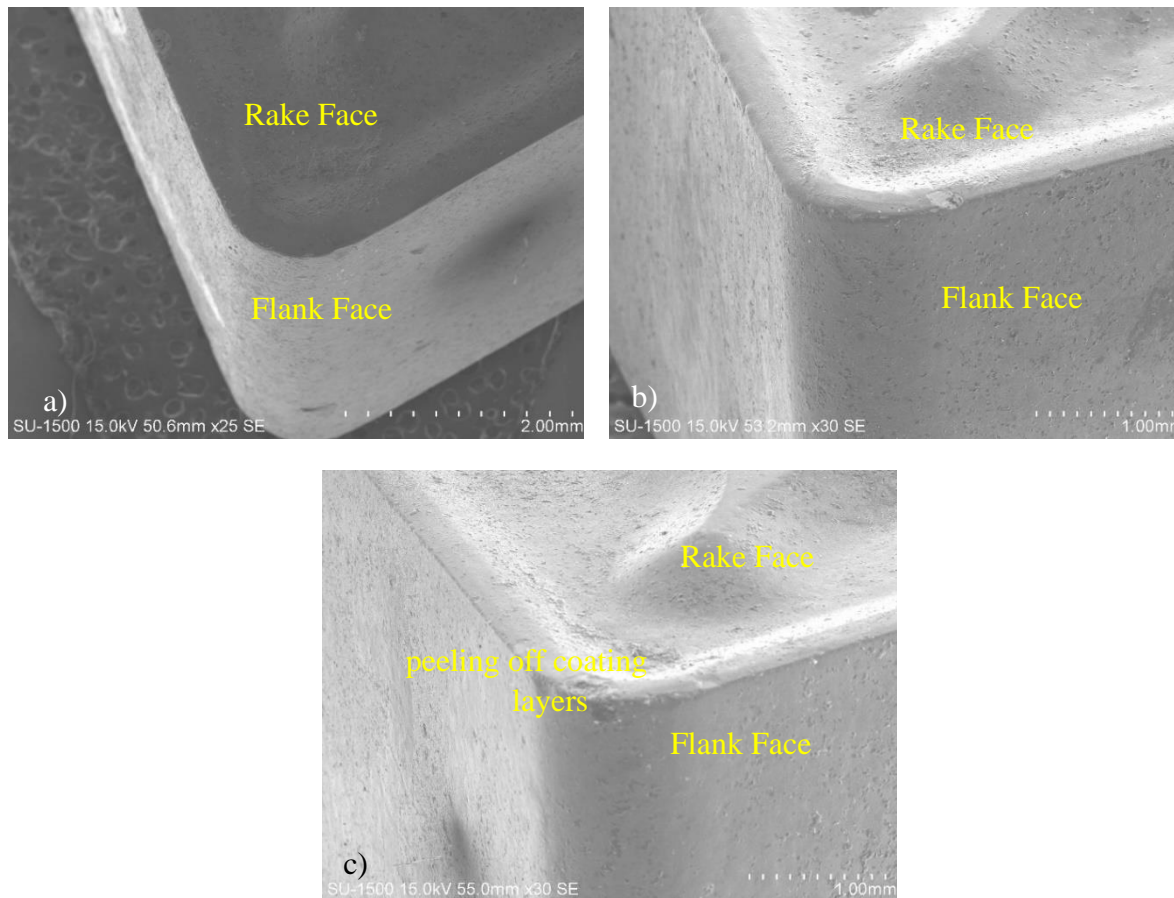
SEM micrographs of TiN/Al₂O₃/TiCN coated carbide inserts a) before machining and after b) 14 min and c) at 42 min machining.
